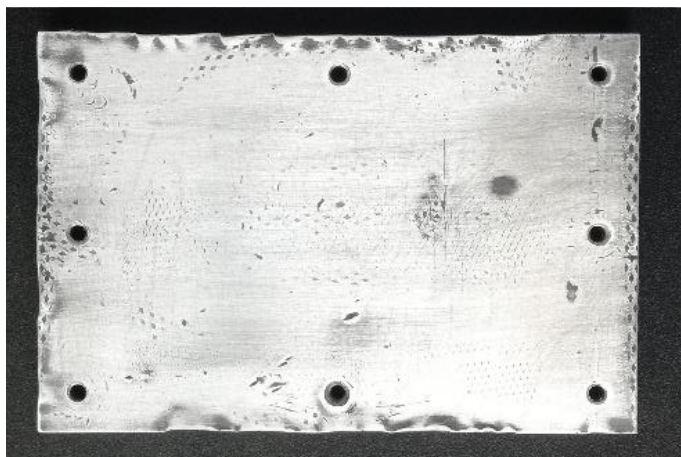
Parts of the Aluminium Mould: Bottom mould layer.
